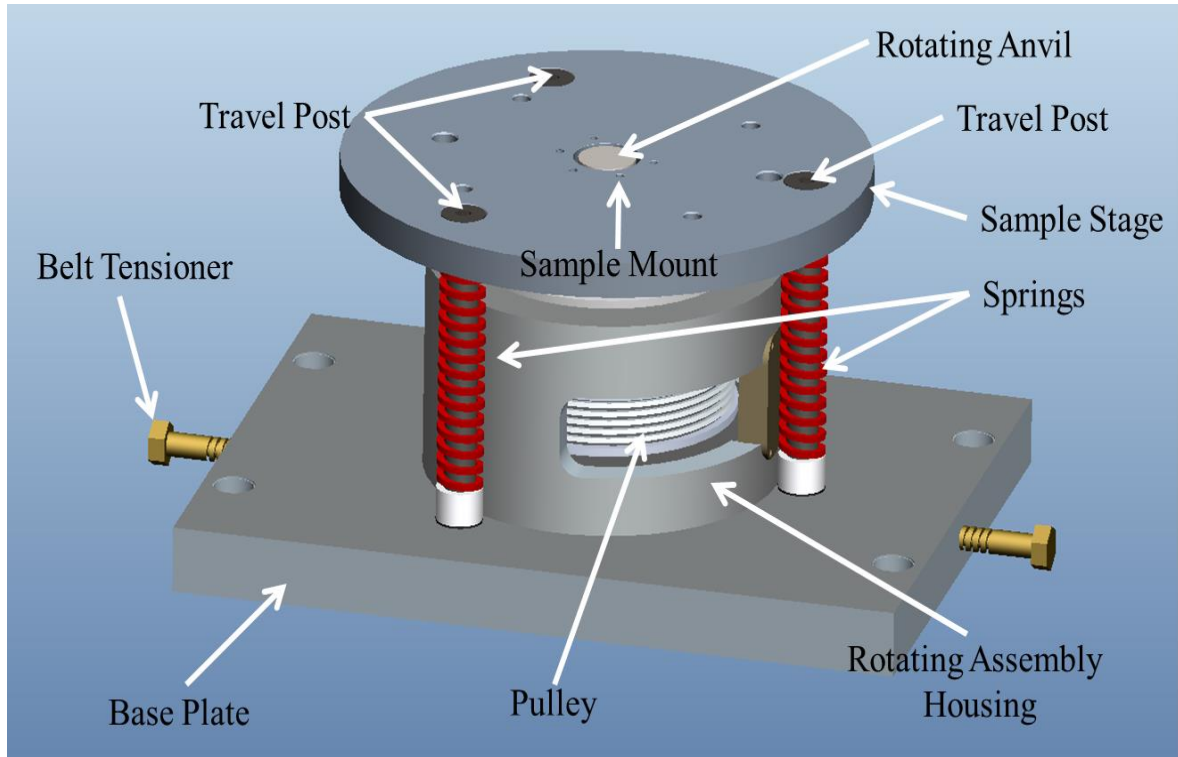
CAD drawing of the preliminary RAFSSW device design.
